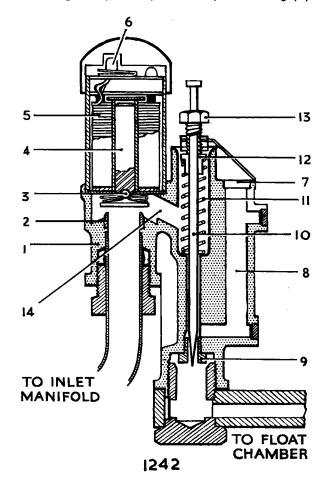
Sectioned view of the auxiliary starting carburetter
